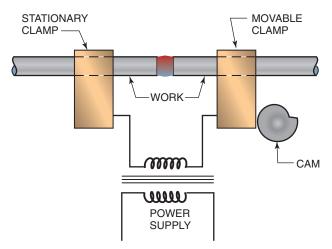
Schematic diagram of the flash welding process.
